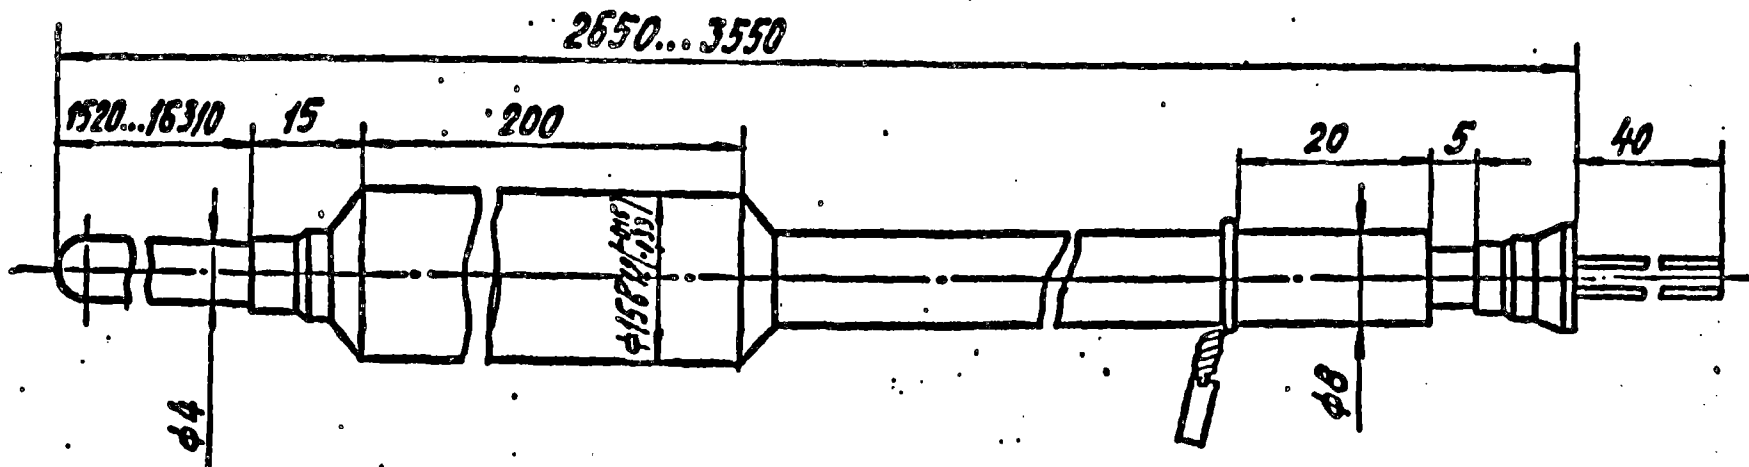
A dimensional drawing of a chromel alumel cable thermocouple
